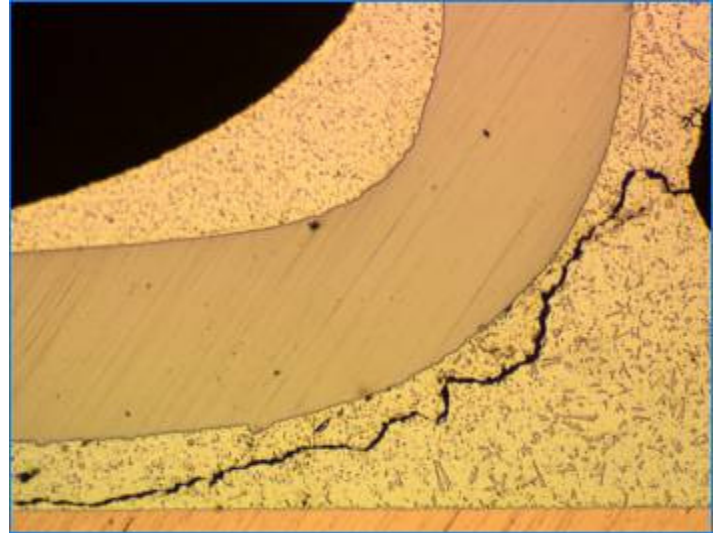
cross section, SN66, U61, left lead solder crack, 200xb
